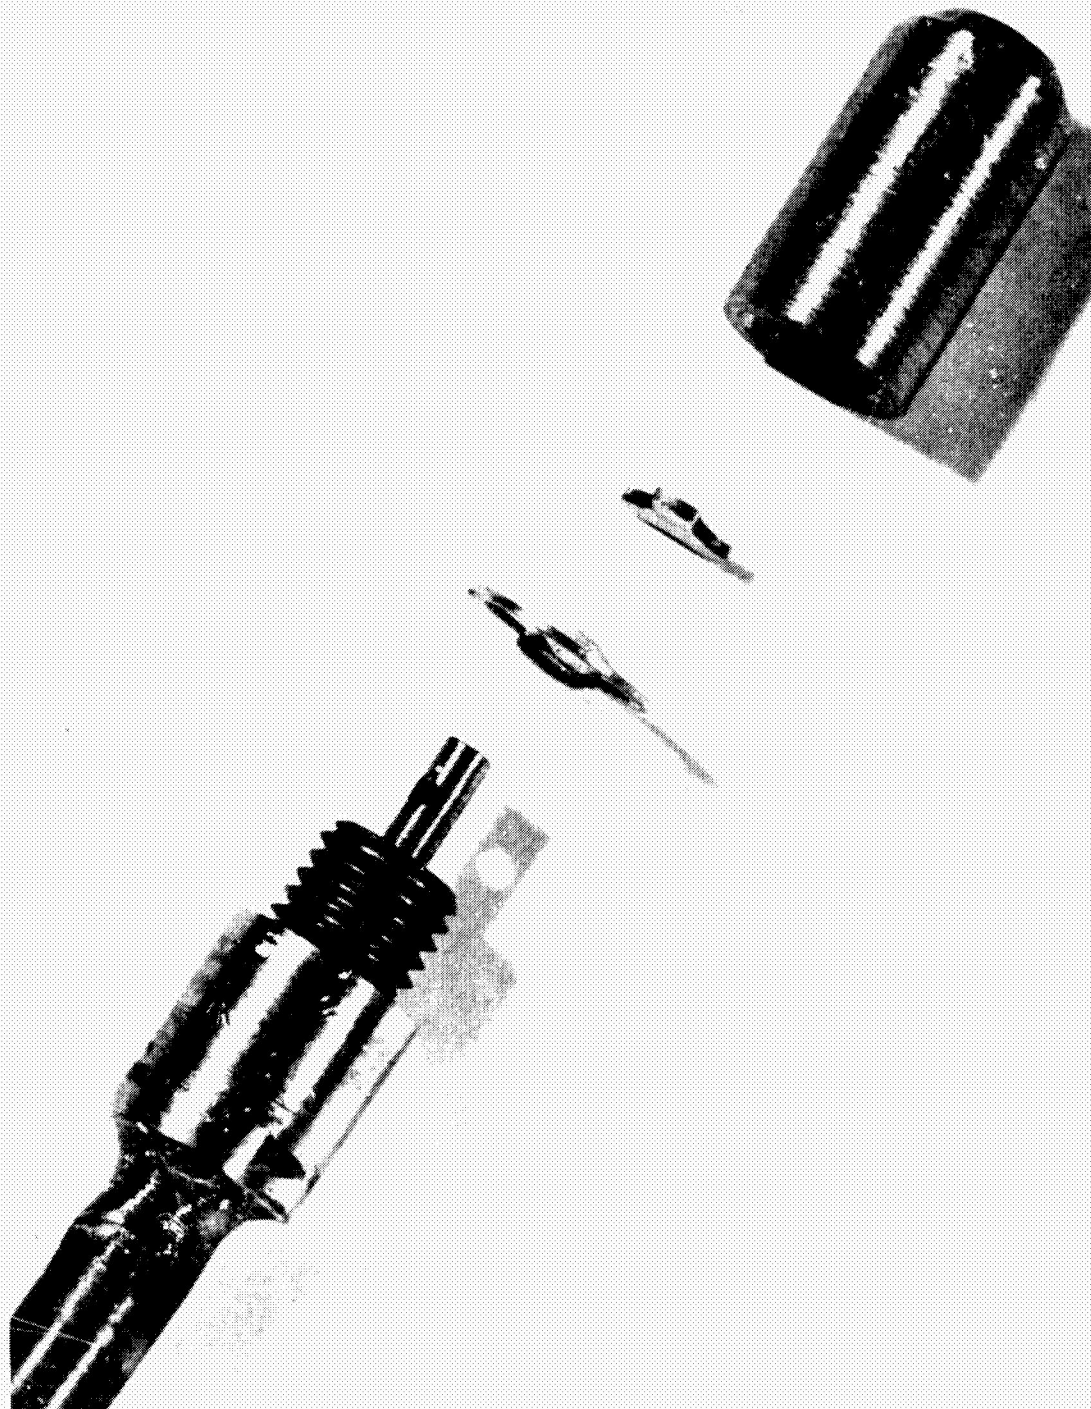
Check Valve in Exhaust Sampling Assembly
